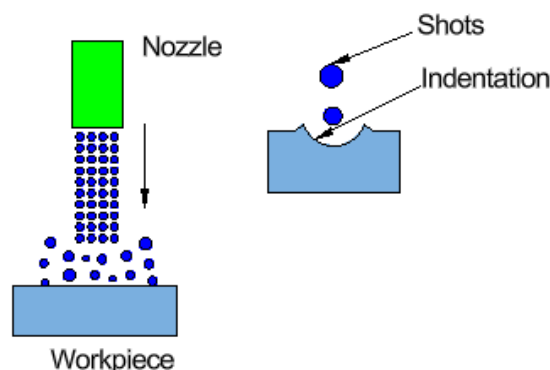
Schematic illustration of the shot peening setup used for surface treatment of DMLS-fabricated Cu–Ni specimens.
